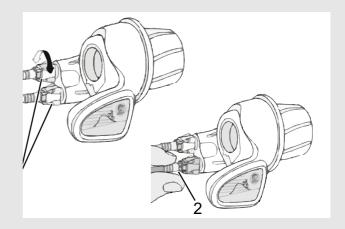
Twist grip with adjusting sleeves (1) and play of the gear shift (2)
